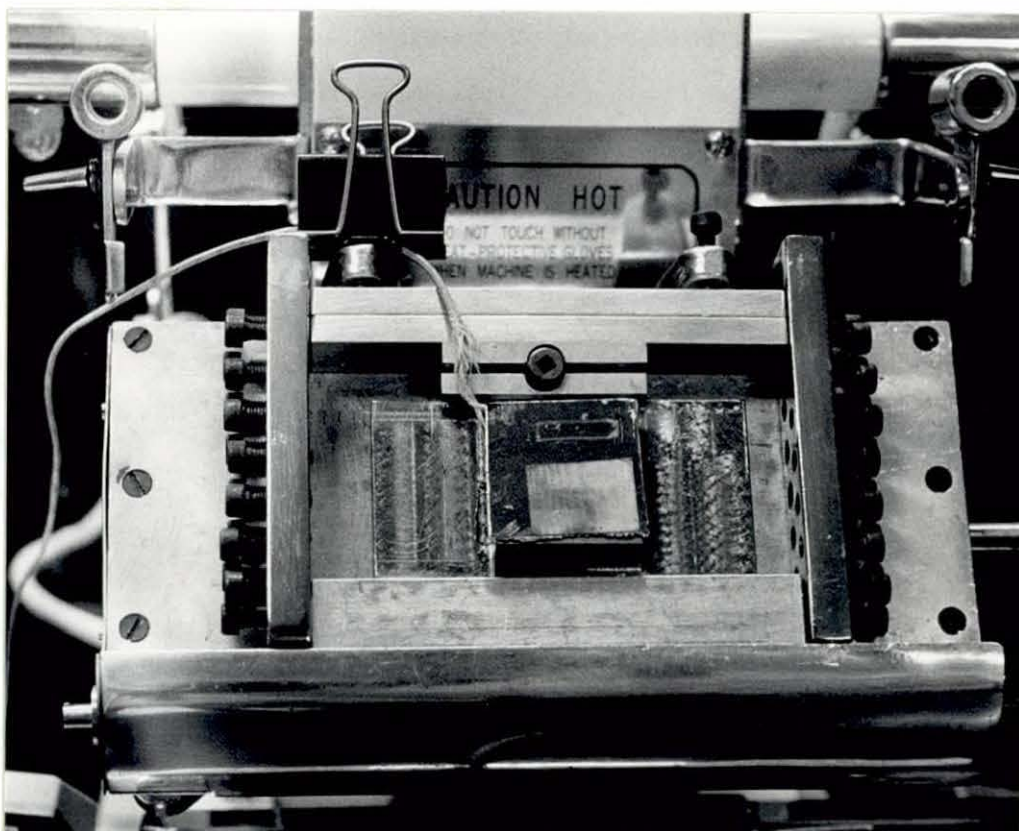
Modified Platen Embosser - Detail of Heated Upper Plate
